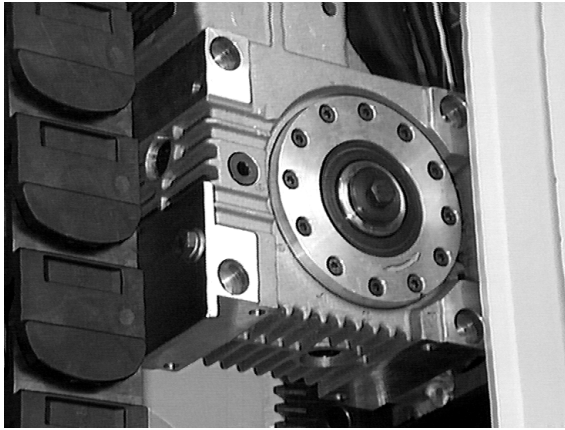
Gearing of the Lifting Column (Axis 6)
